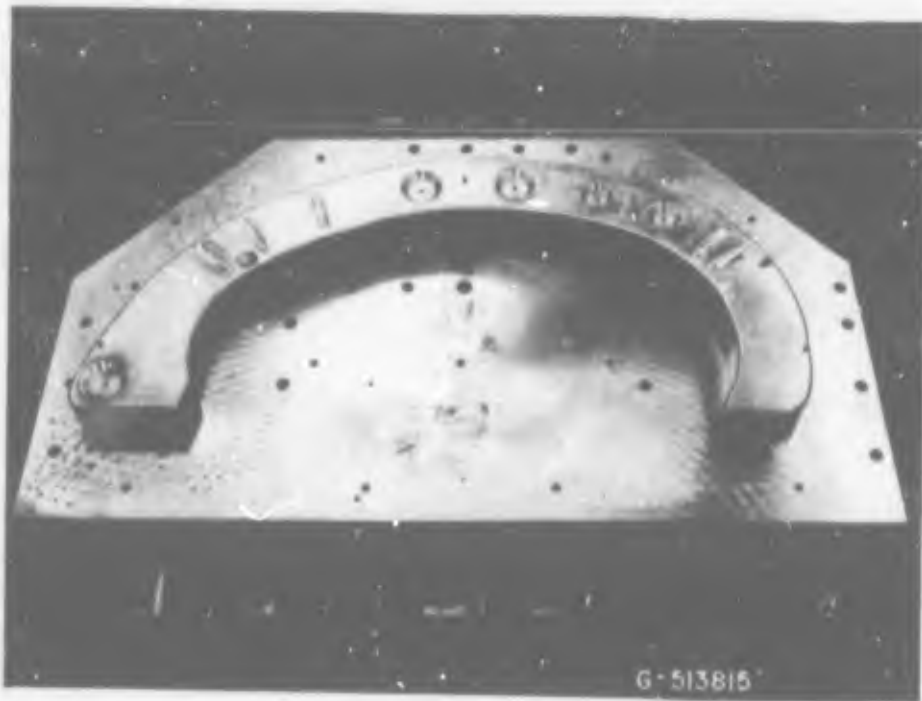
RDM 1496, Male Die for Forming .070" Gauge
